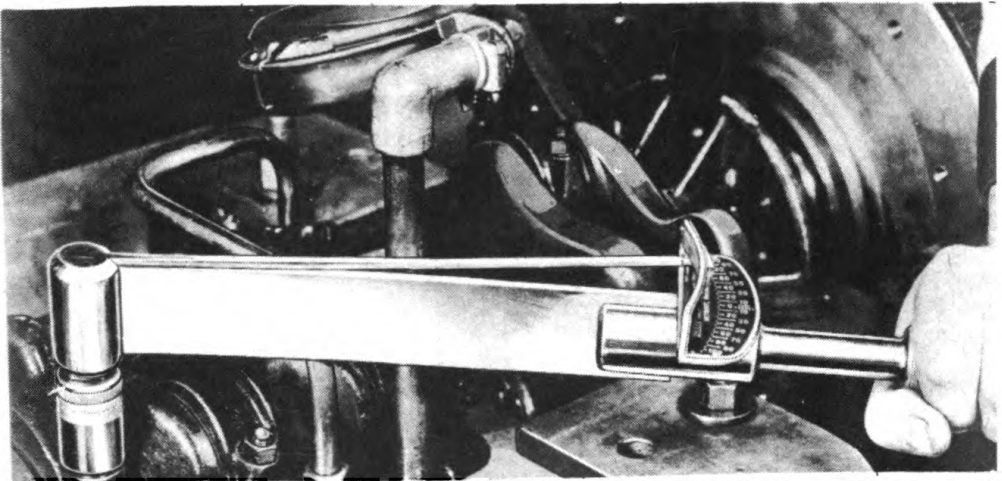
A—Torque Wrench Shown Here Can Be Used to Tighten Cylinder Head
